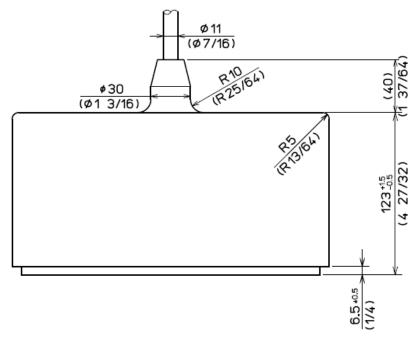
Outline dimensions of a transducer (TD-66)
